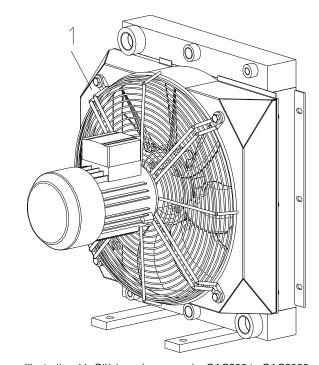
Oil/air cooler; example: OAC200 to OAC2000
